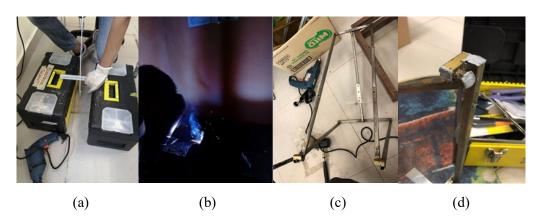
Methods applied in fabricating process; (a) Cutting process using handsaw; (b) Welding process; (c) Post drilling process; (d) Covering holes using rapid steel epoxy
